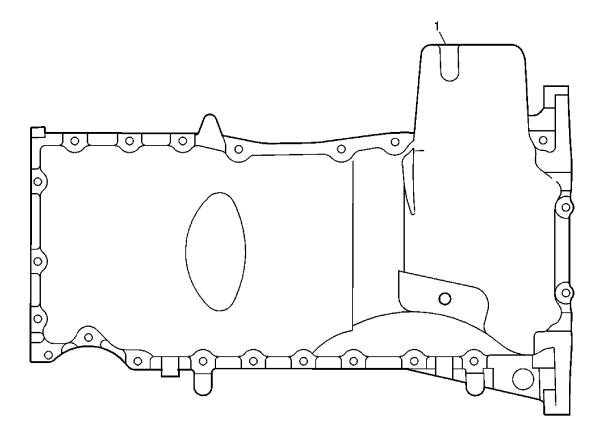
Oil Pan - Bottom View Courtesy of GENERAL MOTORS CORP.
